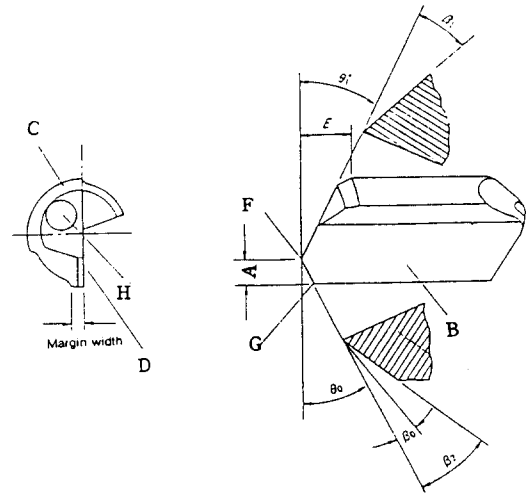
Specifications and Profile of the Bevel Type Point Shape Gun Drill
